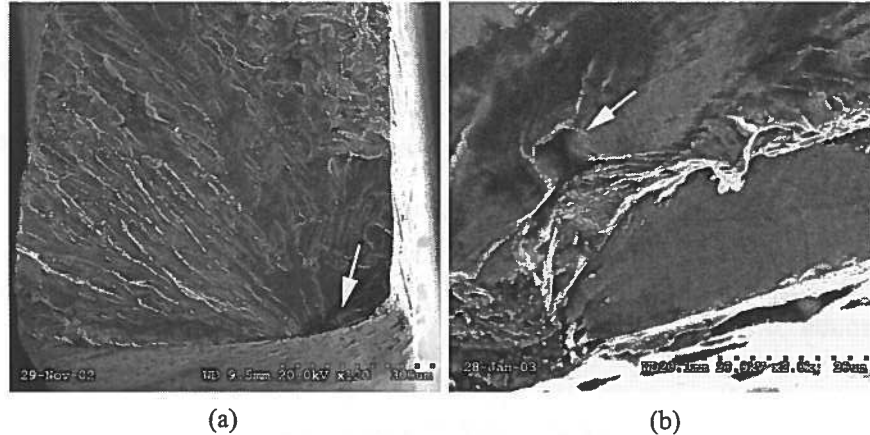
High temperature fatigue fracture surface and crack initiation site in investment cast IN-625.
